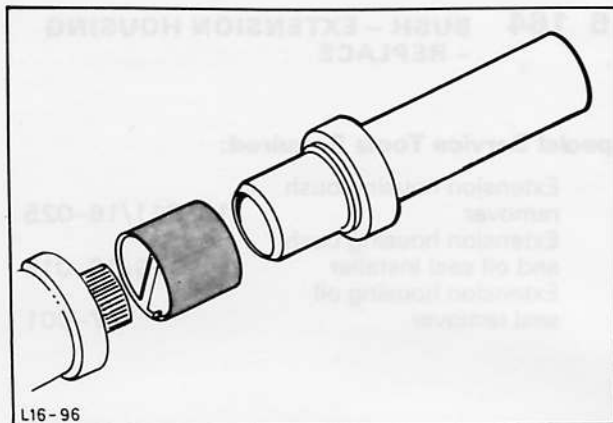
Fit extension housing bush with Special Tool No. 16-015/16-016
